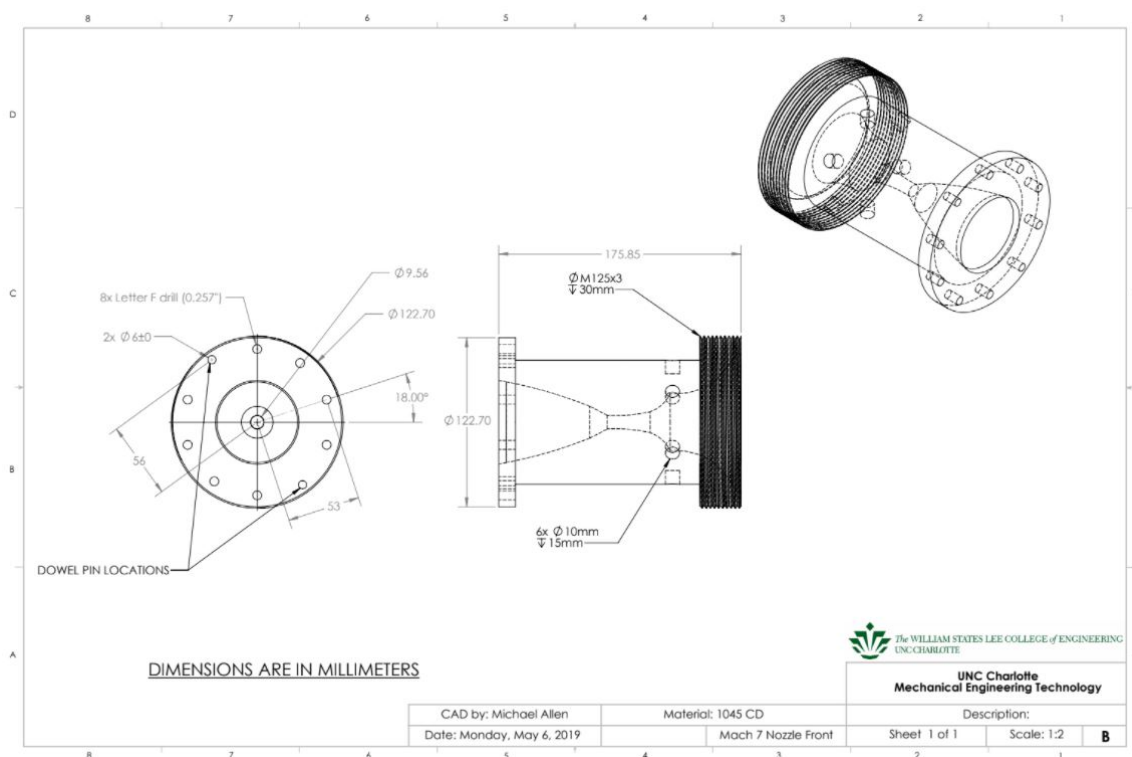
Drawing of the UNCC HSWT Mach 7 inlet.
